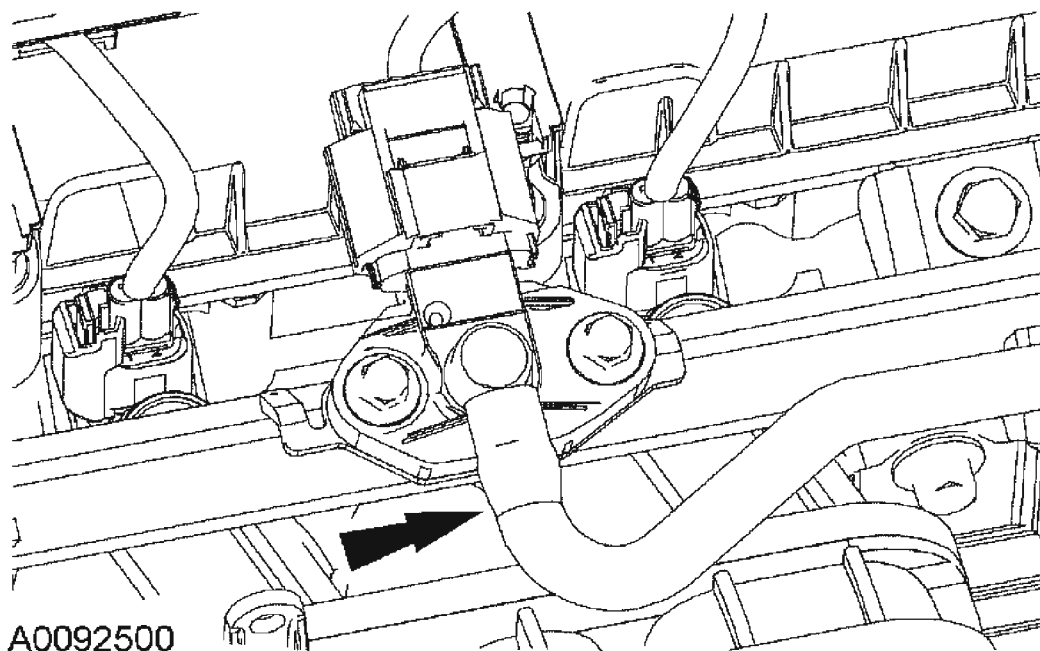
Connecting Fuel Rail Pressure And Temperature Sensor Vacuum Hose
